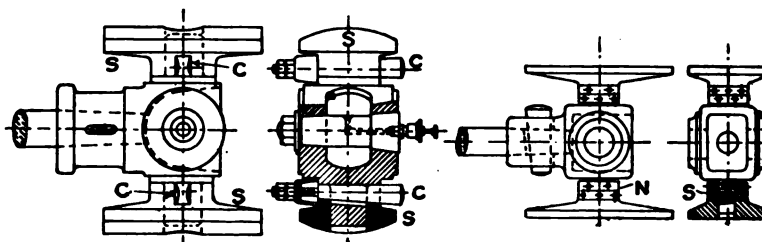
, 639.—Slipper cross head for small engines (Drawing Exercise).
